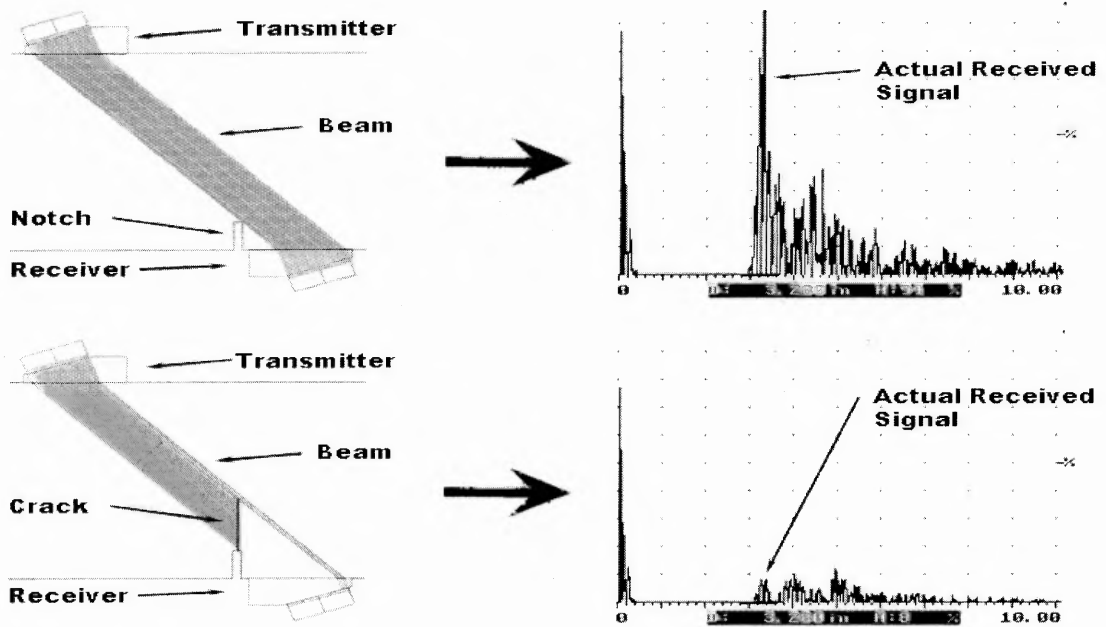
Crack Detection Process ---Crack Propagation Shadows Ultrasonic Beam.
